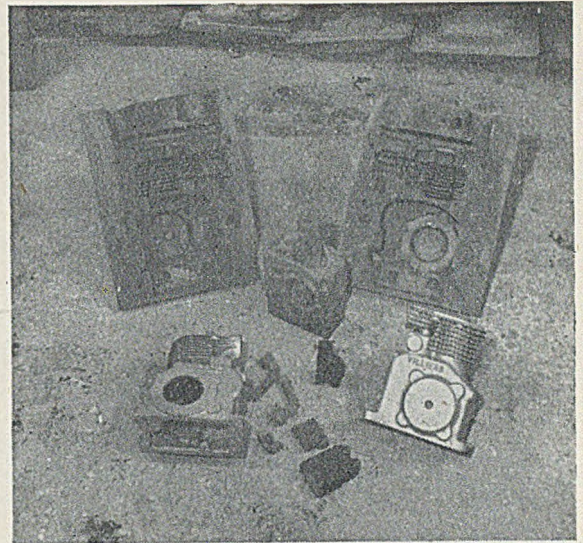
Combined Cylinder and Crankcase Castings for a Small Air-cooled Engine, together with the Shell Moulds, Shell Cores and Ordinary Cores used in their manufacture.
